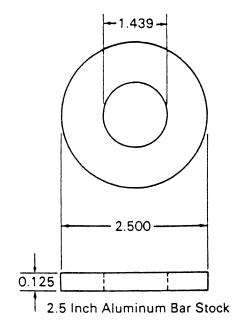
Hydraulic Piston Pump – Driveshaft/Pump Housing Bearing Removal Tool
